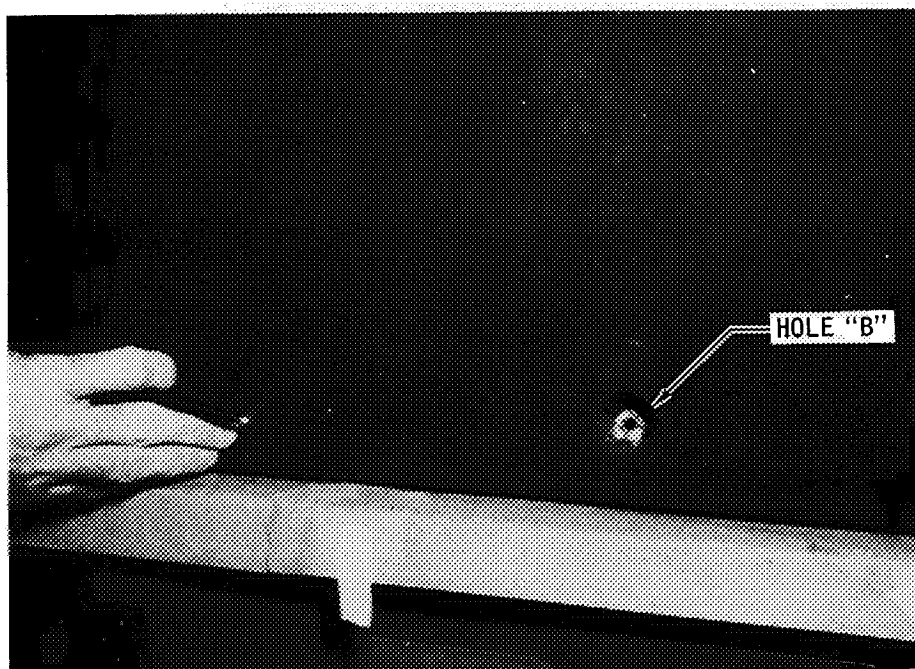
DAMAGED ABLATOR PLUG HOLES
